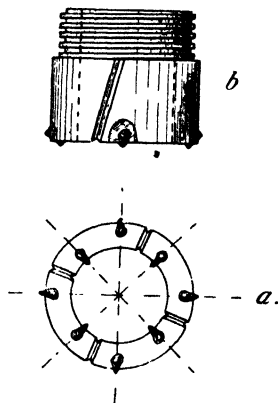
Setting of Diamond Crown. (a) Plan of Face; (b) Elevation.
